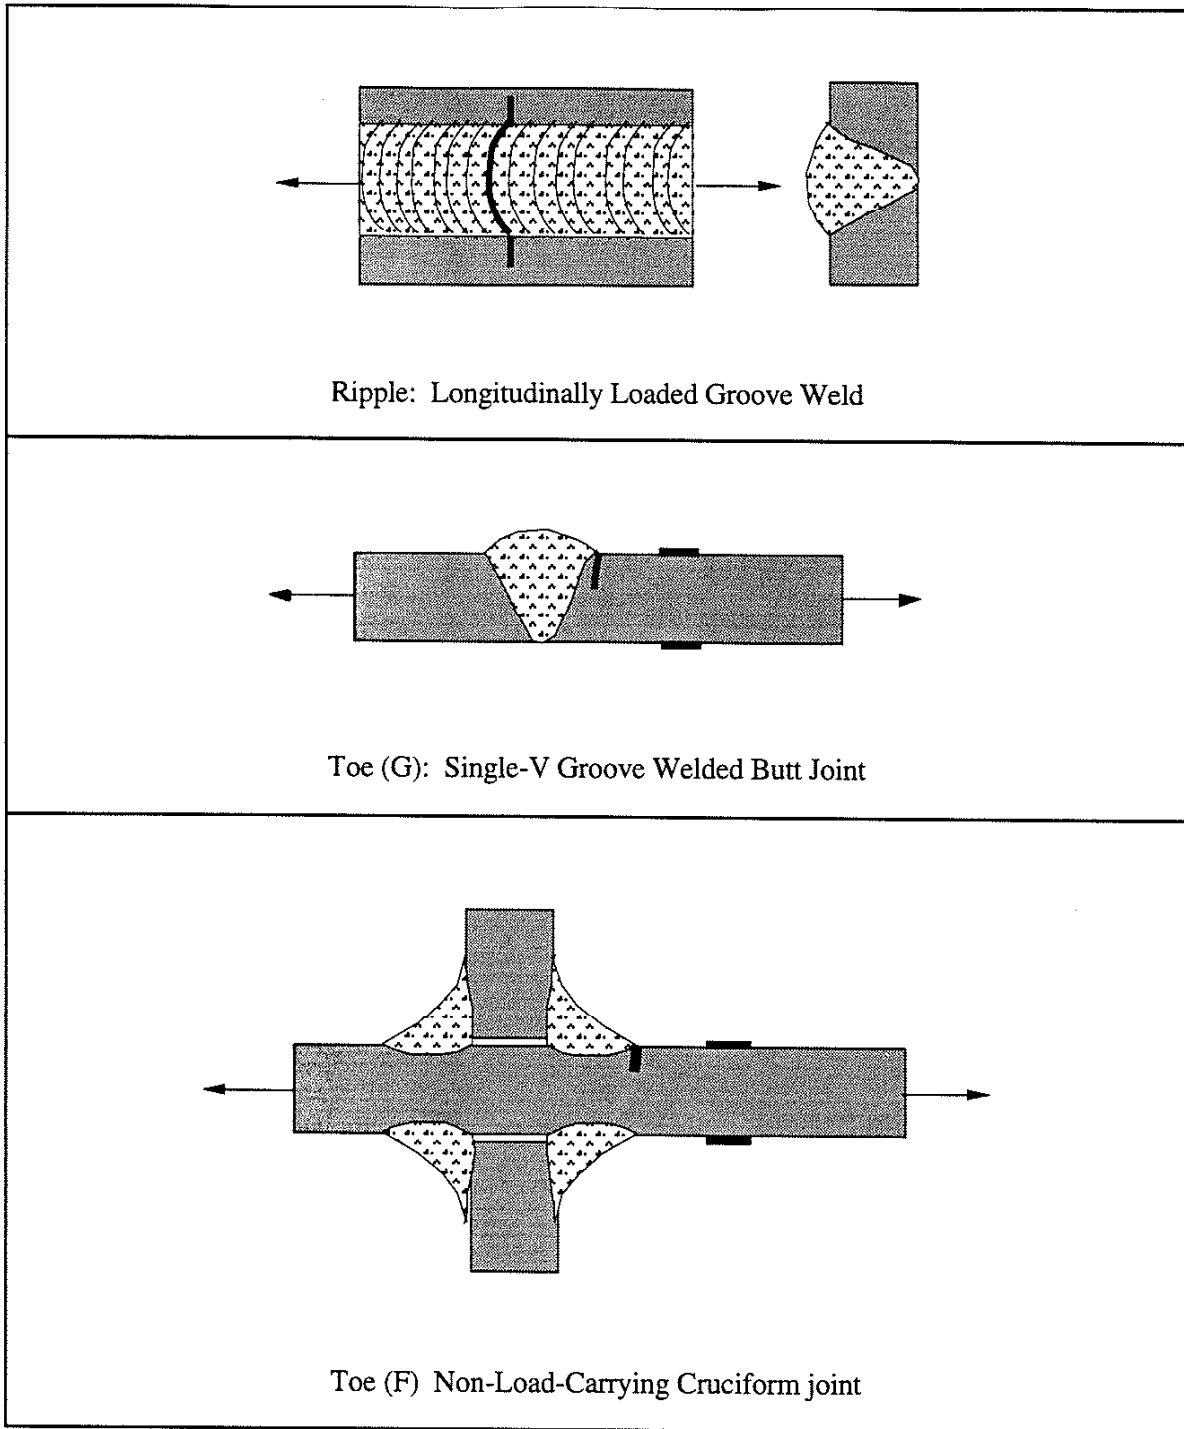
The "Good" welds. Initiation site at a weld ripple or a weld toe.
